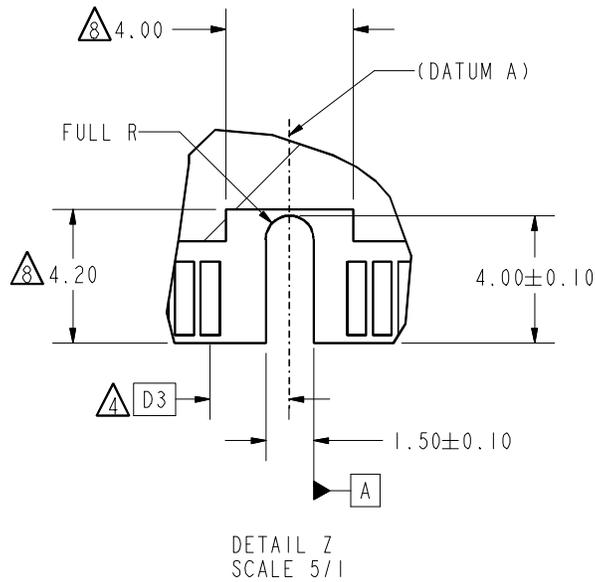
SO-DIMM Mechanical Drawing (3 of 5)
